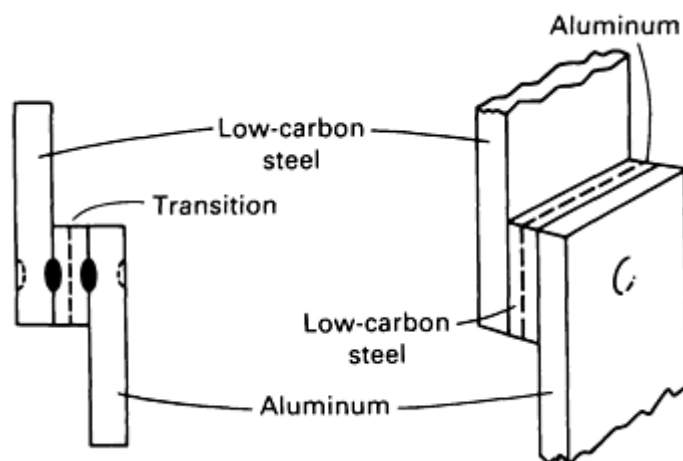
Illustration of a steel-clad aluminum transition insert used for joining aluminum to carbon steel
